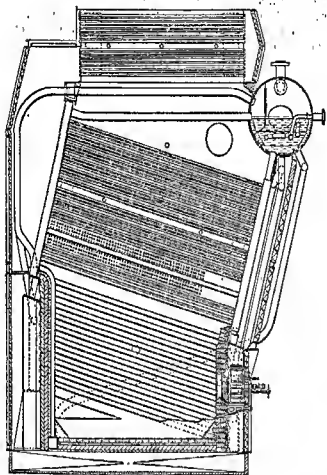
Babcock and Wilcox design of sectional-header marine boiler.
